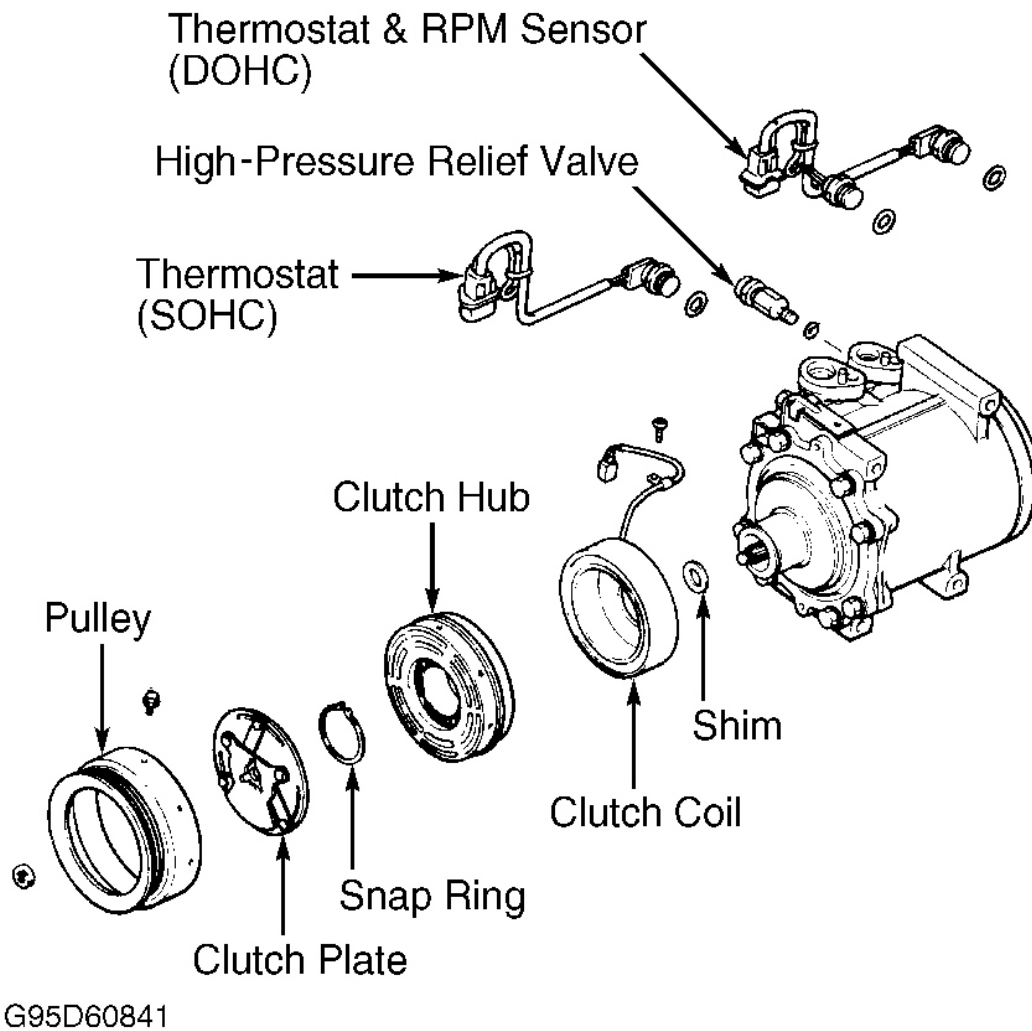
Exploded View Of Compressor (Sanden MSC105 Scroll Shown; MSC90C Is Similar)
